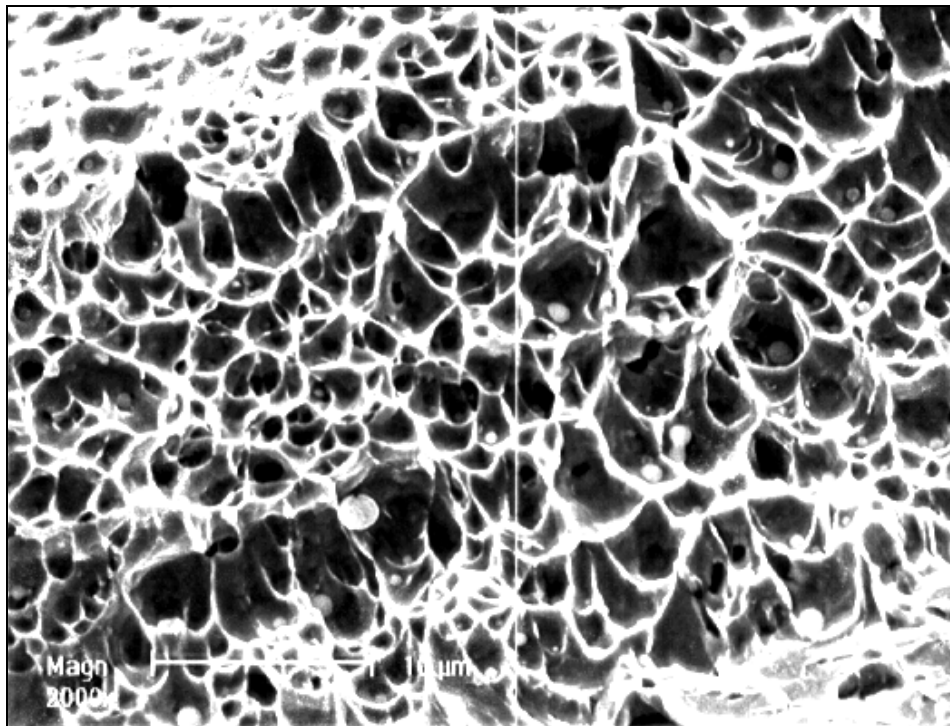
Fracture surface of metal weld deposit with 0.4%Mo
